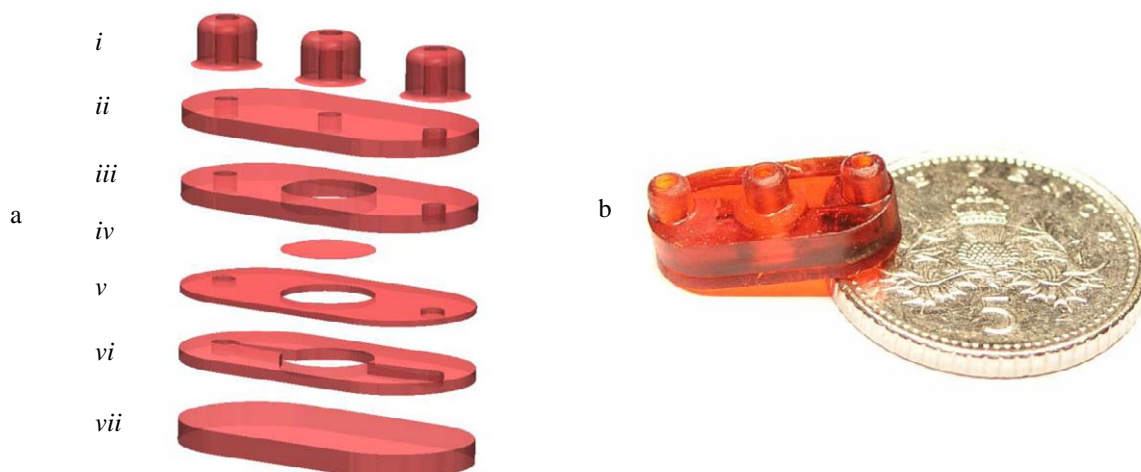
(a) Exploded view of the device, showing the design features of our device, including *i*: 3 fully integrated pipe fittings (inlet, outlet, and a pneumatic port for membrane actuation); *ii-vi*: integrated 1 mm diameter fluidic channels; *iii*: a 0.75 mm deep pneumatic chamber above a 70 μm thick 4 mm diameter pump membrane (*iv*); *v-vi*: a 0.75 mm deep pump chamber flanked by a pair of 0.5 mm deep nozzle/diffuser elements (200 μm inlet to 1 mm outlet, 8° divergence from centreline) on top of a 0.75 mm thick base (*vii*). Note that the layers shown in the diagram are for visualisation only, and do not represent the layers used during fabrication. (b) Photograph of the micropump with a UK 5 pence piece (18 mm diameter) for scale. The device body measures 13.63 \times 7 \times 3.28 mm (l/w/h); the pipe fittings measure 2.5 mm diameter and are 2 mm tall.
